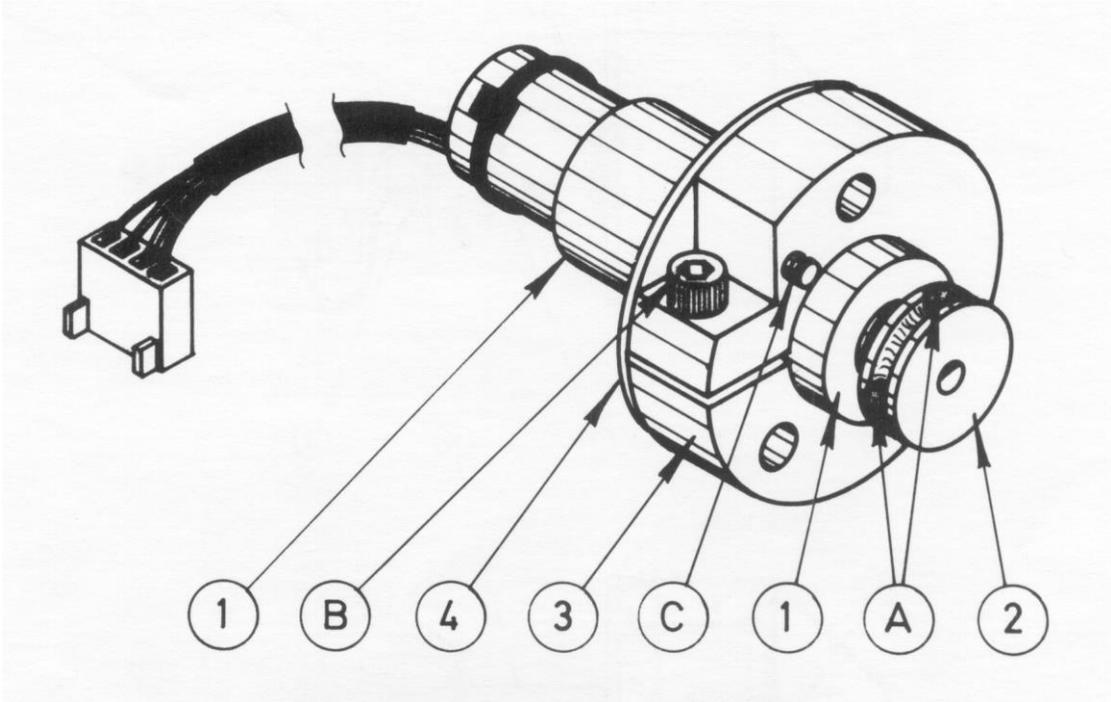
MOTOR-TACHO ASSEMBLY (34123-0440-0)
